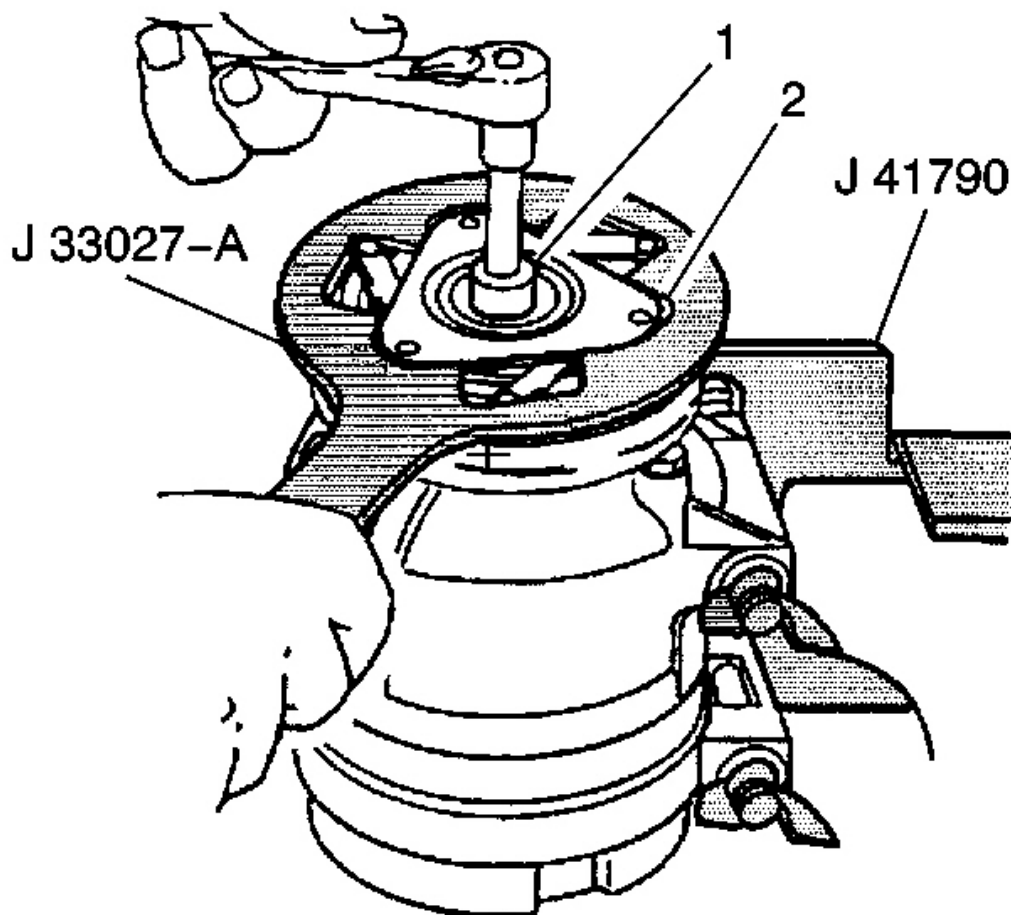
Clutch Hub, Drive Plate Assembly, J 33027-A & J 41790
